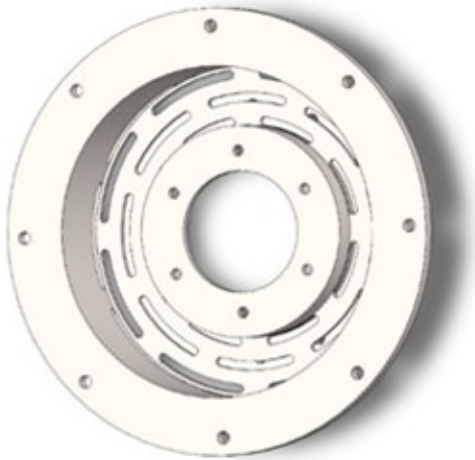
A simple diaphragm flexure designed to be machined conventionally on a lathe and a mill.
